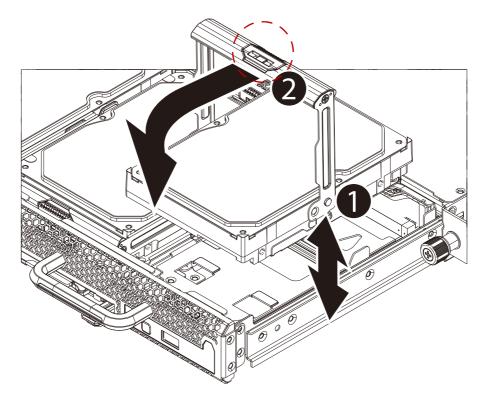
Installing a HDD carrier Assembly Bracket to HDD drawer
